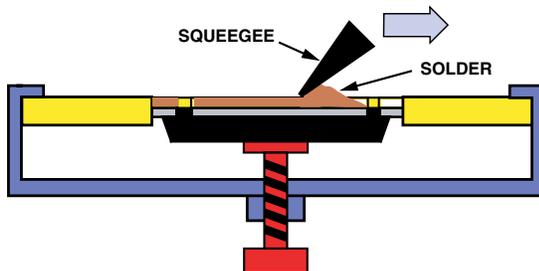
Solder Paste is Applied Through Stencil to the Undersurface of the LFCSP
